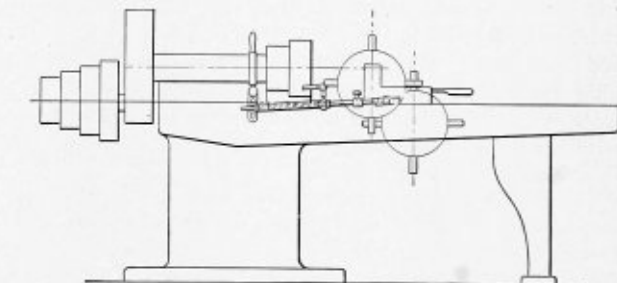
ACME STAY-BOLT CUTTER WITH TAPER ATTACHMENT APPLIED.
